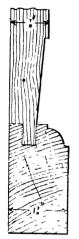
Section of End Panel Framing of Writing Table and Cabinet.
